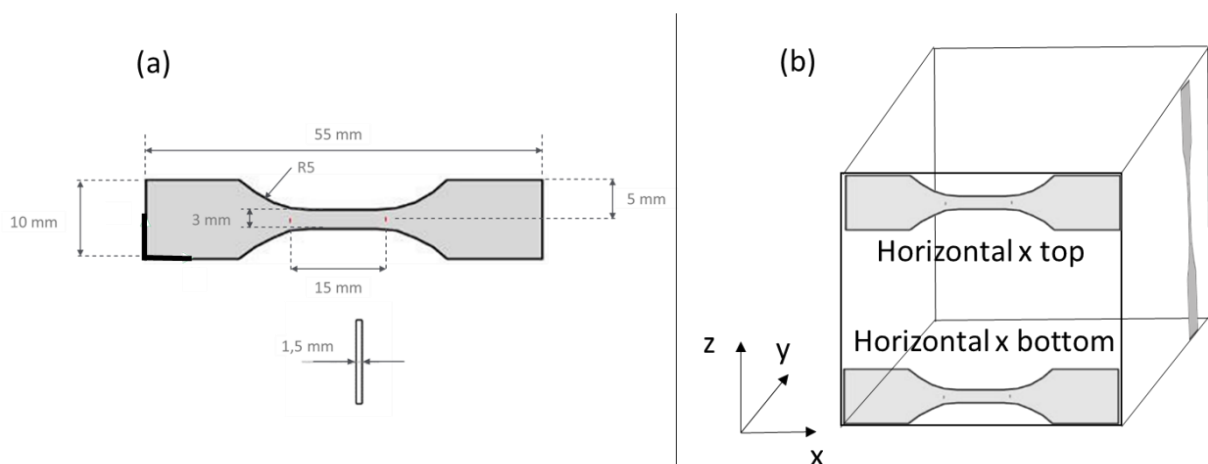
(a) Dimensions of the tensile specimens. (b) Schematic illustrating how the tensile specimens were extracted from the cube samples.
